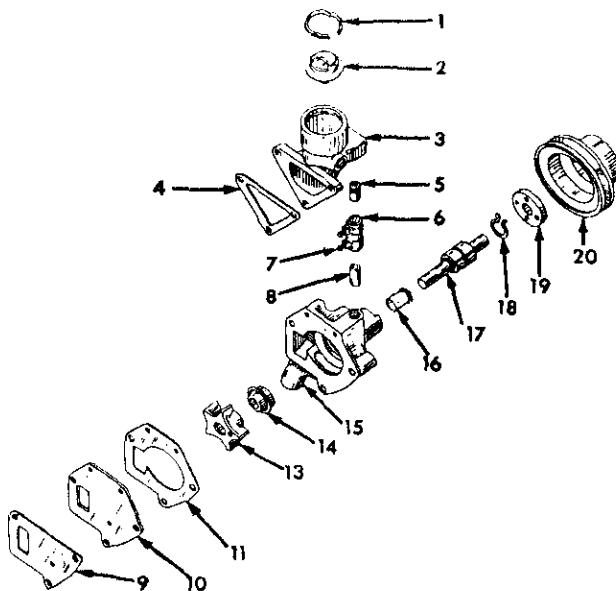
Exploded view of the water pump used on Series 424, 444, 2424 and 2444 non-diesel tractors.
